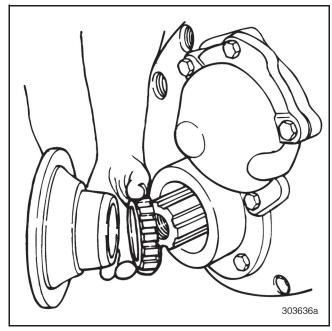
Installing Output Yoke and Speedometer Tone Wheel
